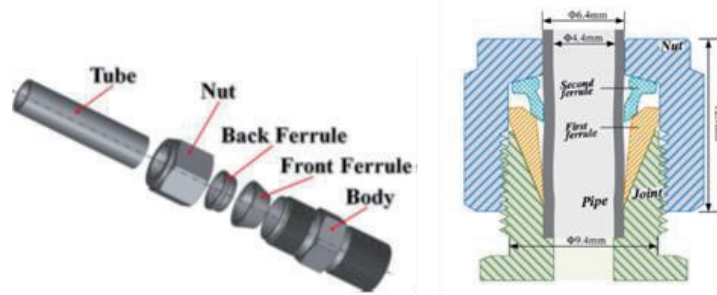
Double ferrule tube fittings components and Sectional view of the double ferrule tube fittings
